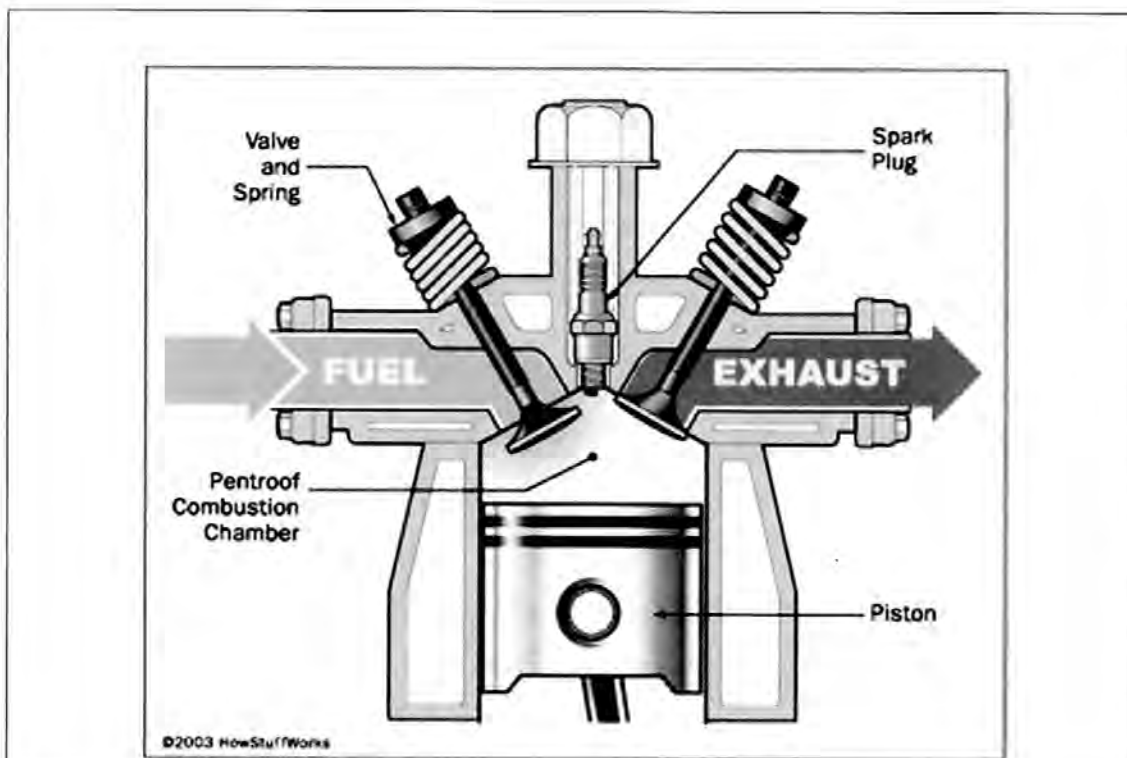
Inside a typical car engine. Fuel is exploded in the combustion chamber to provide mechanical energy through the piston.
